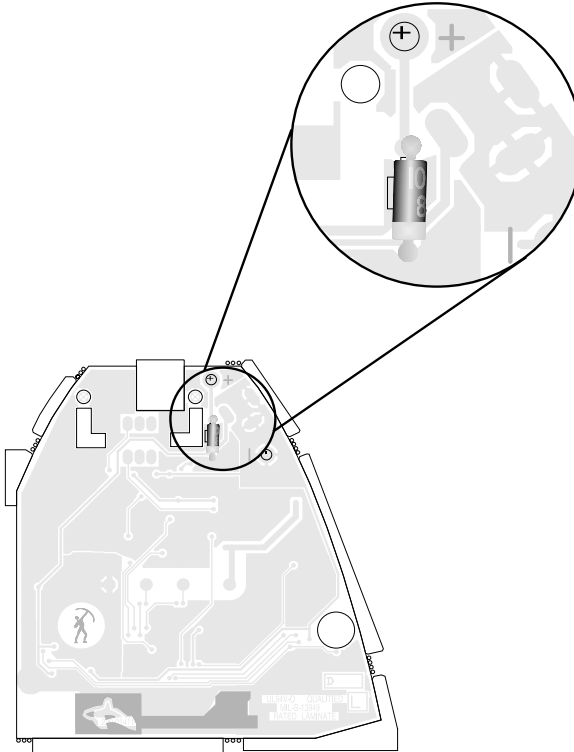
The Tait Orca Fast Charger PCB. The inset shows where to place the diode (1N4001 or similar) for using the PCB in a multi-charger
